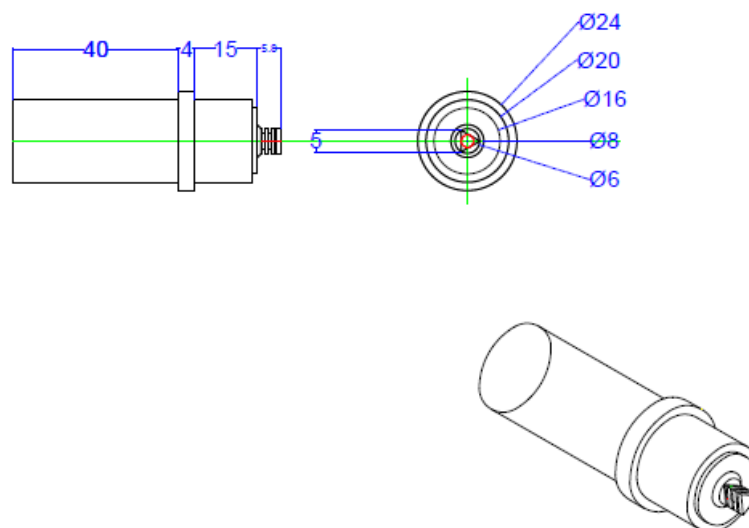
Tool geometry (all dimensions are in millimetres)
